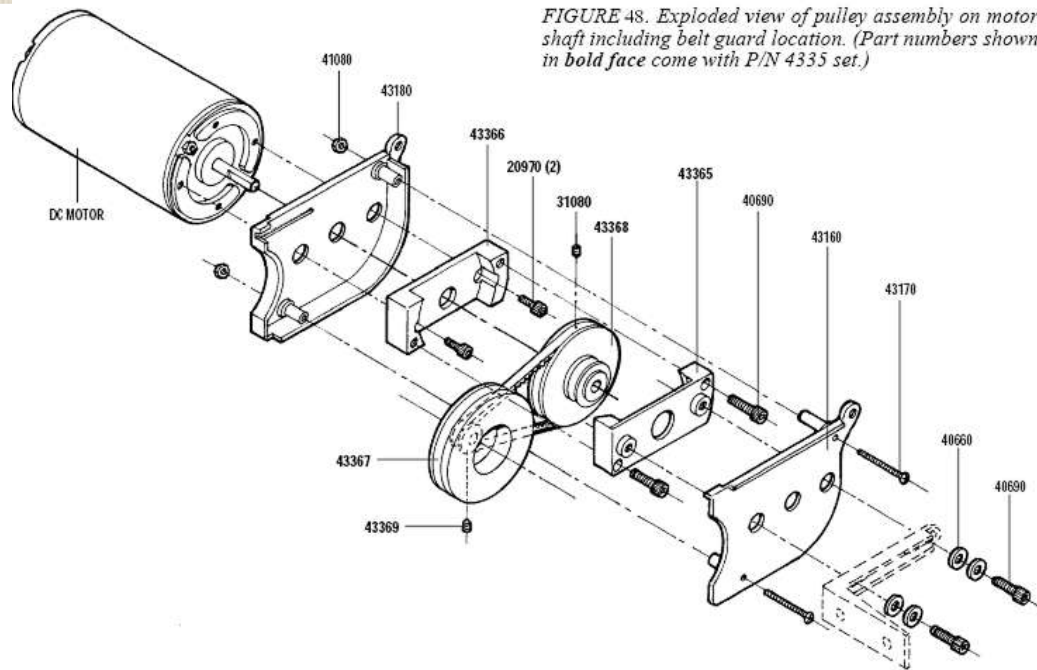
Exploded view of pulley assembly on motor shaft including belt guard location. (Part numbers shown in bold face come with P/N 4335 set.)
